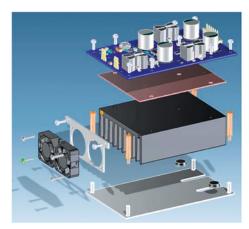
Dual Fan Extruded Heatsink Design showing Complexity of PCB Imported from PADS
